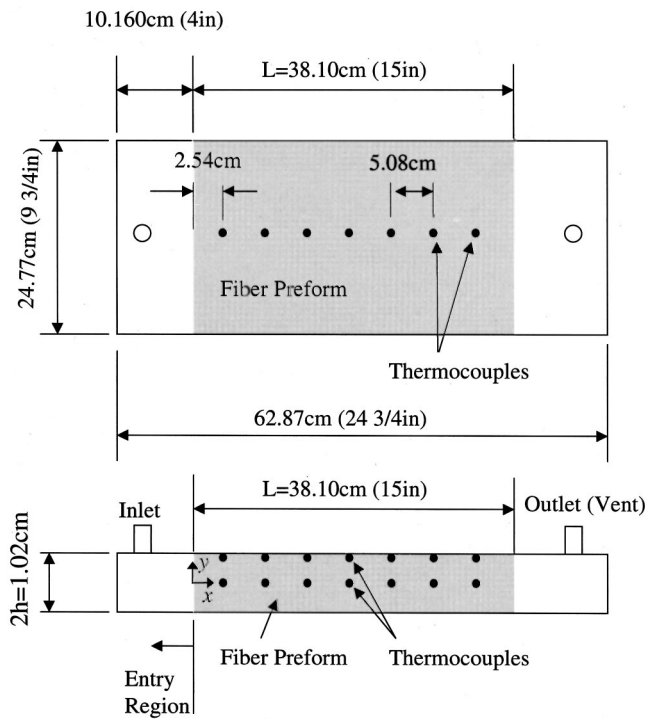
Dimensions of the mold cavity and the locations of thermocouples
